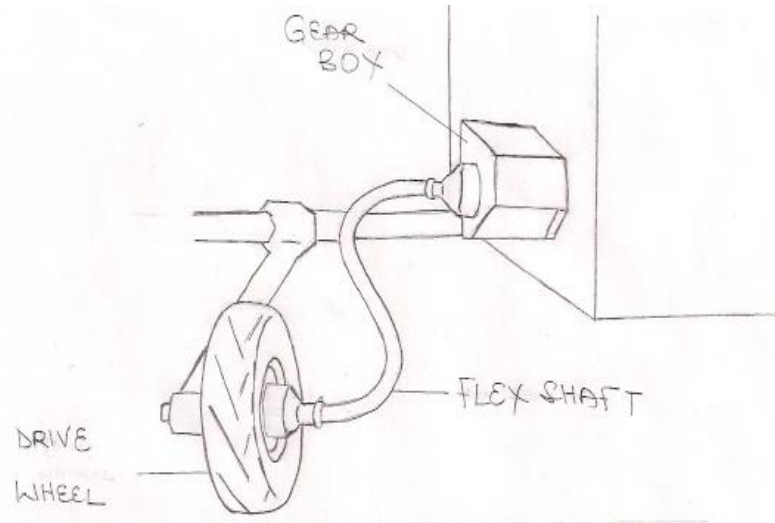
Flexible drive shaft design diagram. Image credit: Najib Adamu
